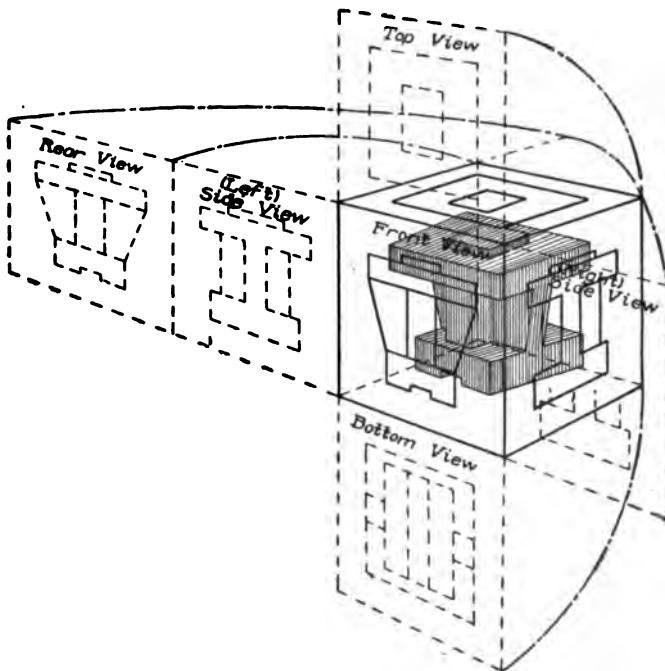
Folding Out of the Projection Planes Into the Plane of the Surface of the Drawing Paper
